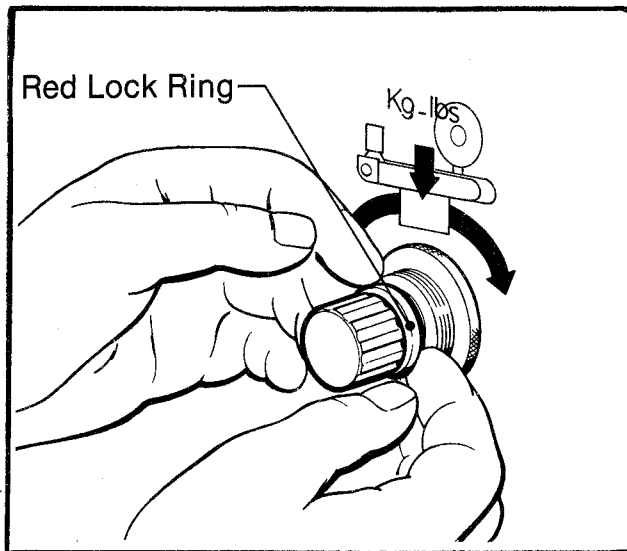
Top Head Pneumatic Regulator Locking Ring
